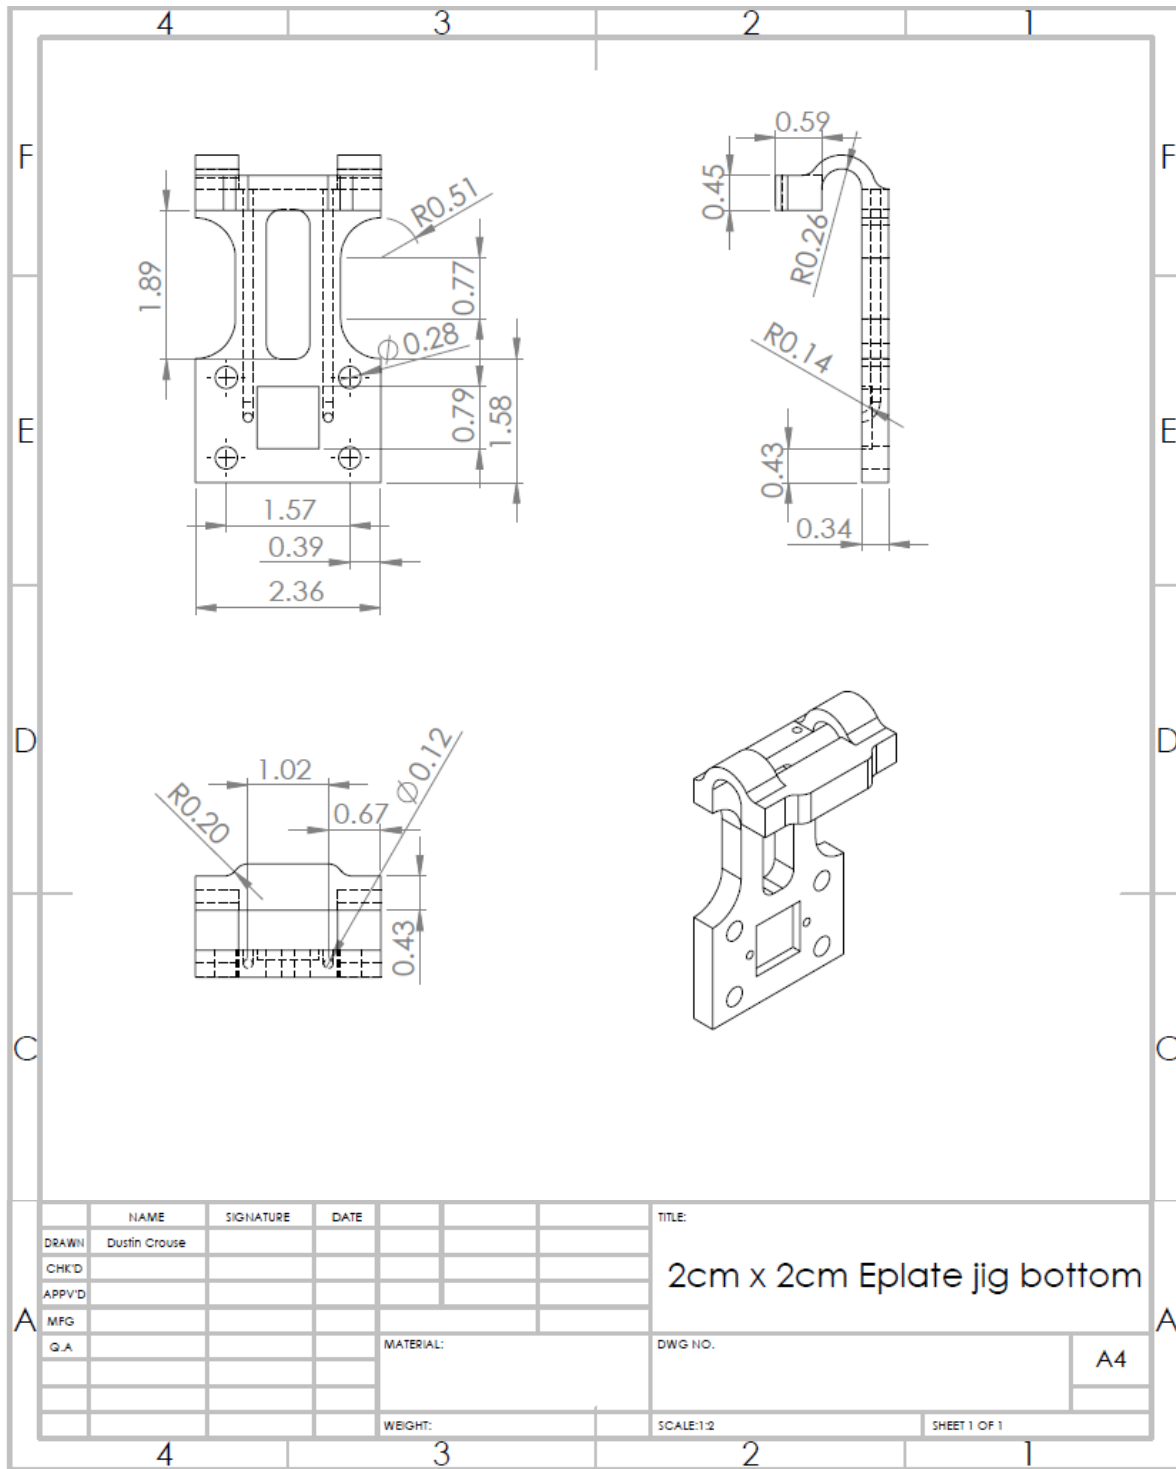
SolidWorks drawing file demonstrating electroplating jig dimensions in different views
